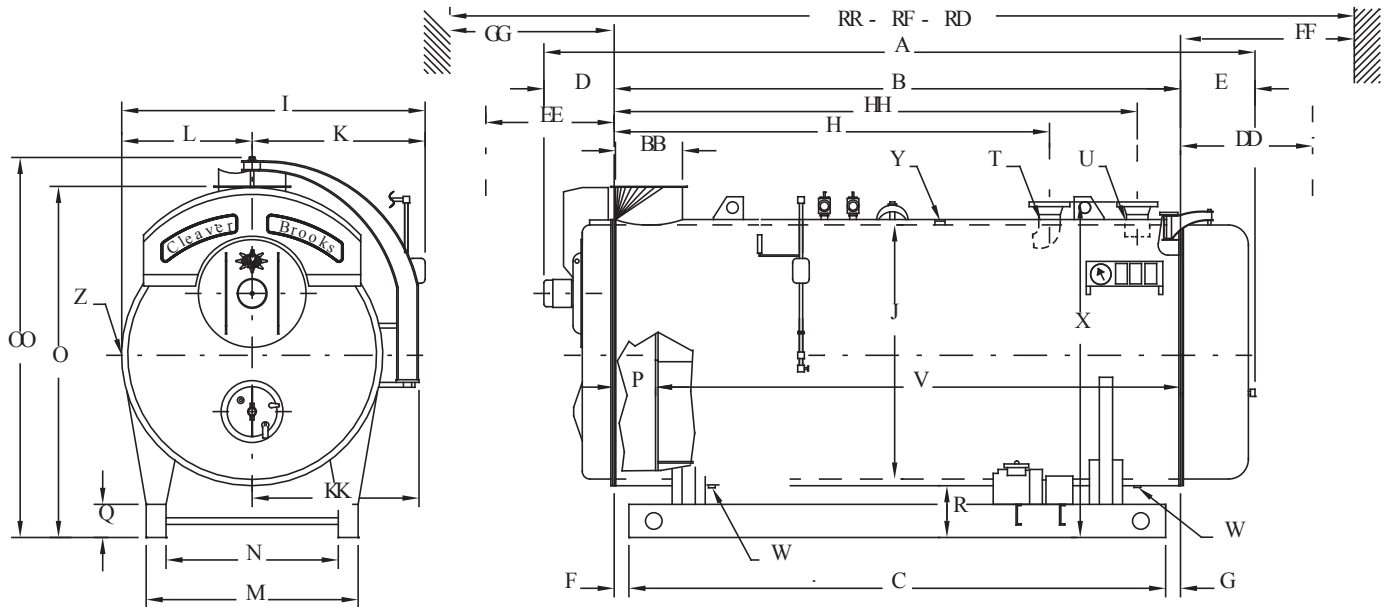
Dimensions CBLE Hot Water 400-800 HP
